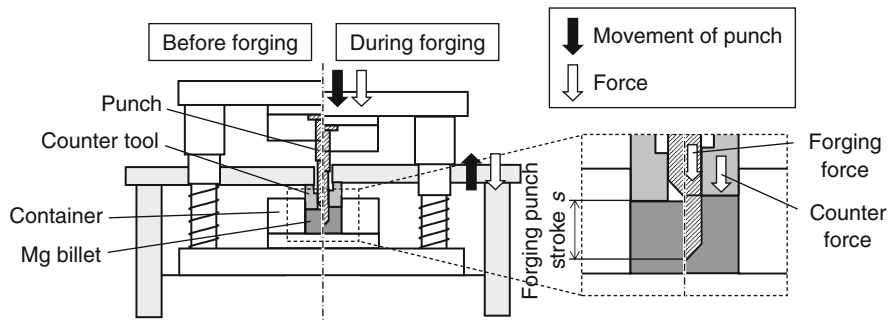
Cold die forging of magnesium billet against counter punch pressure [6]
